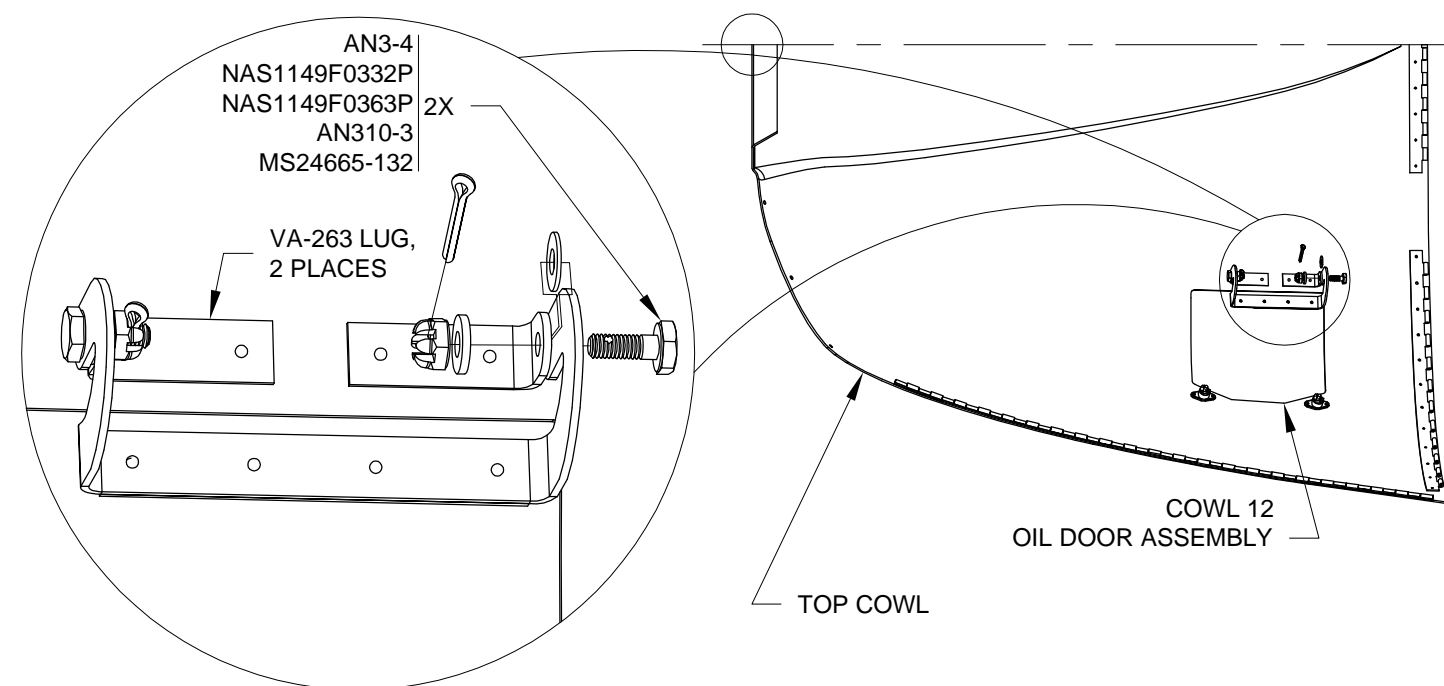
OIL DOOR ASSEMBLY INSTALLATION
